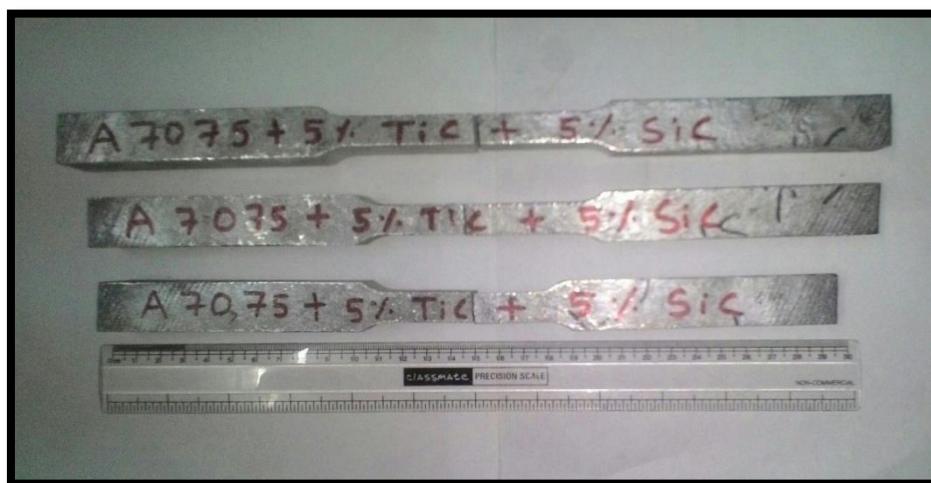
Tensile Specimens of AA7075-SiC and TiC composites after fracture
